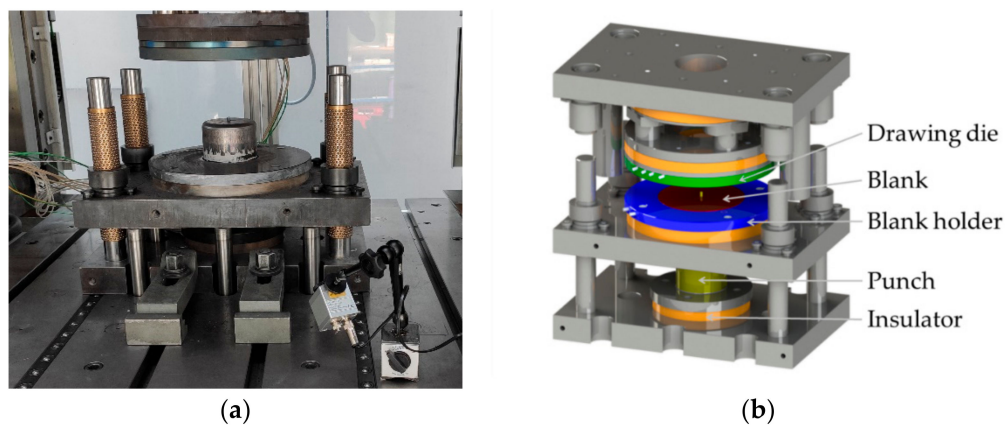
Deep drawing tool mounted in press (a) and CAD design of the deep drawing tool (b).
